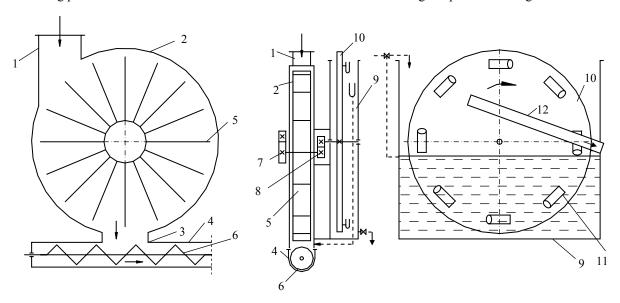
Schematic diagram of wheat humidifiers with buckets disc 1.seed feeding; 2.rotor shell; 3.screw conveyor feeding; 4.screw conveyor; 5.propeller with palettes; 6.blending screw; 7.electromagnetic brake; 8.cilindrical gear; 9.water chamber; 10.buckets disc; 11.buckets; 12.water collecting and evict eaves
